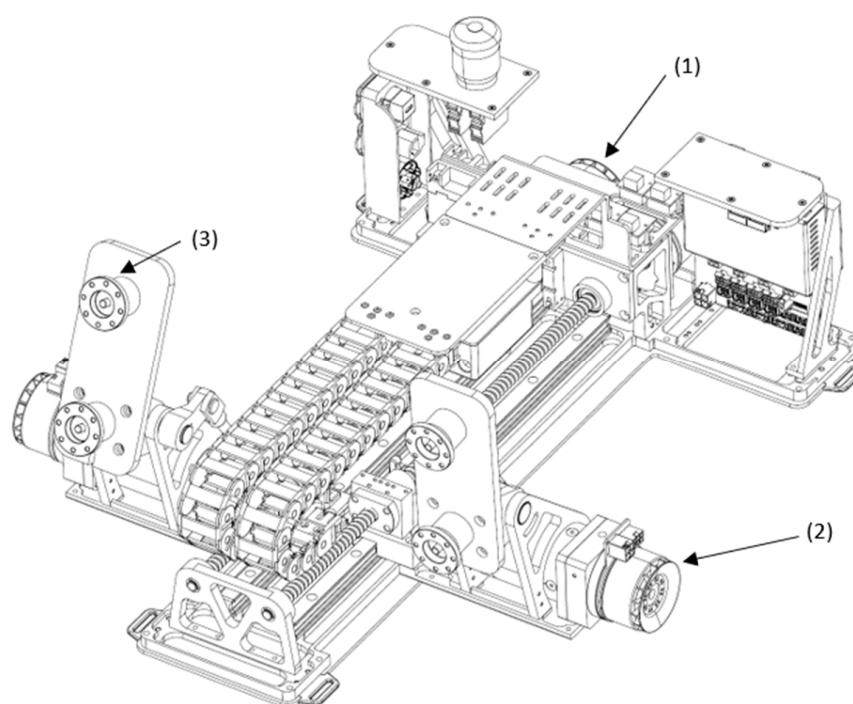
CAD of the lower-limb therapy device. The system housing, the foot plates, and the cases for the foot platforms were removed so as to show the drives and mechanical components. (1) Motor for linear movement, (2) motor for ankle dorsiflexion/plantarflexion, and (3) force sensor.
